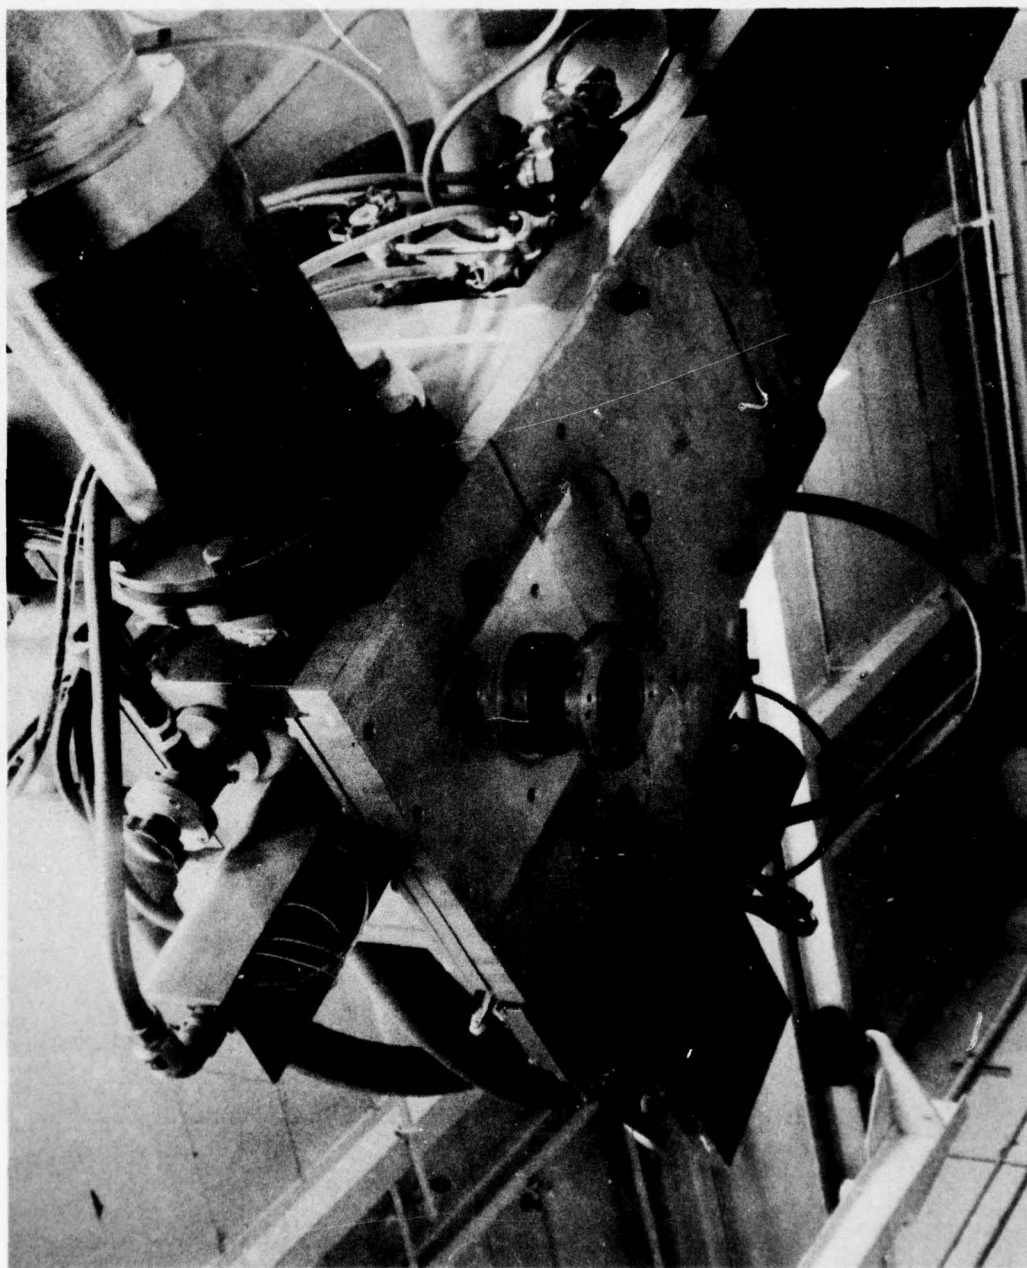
Sliding Seal Head Assembly Removed From Welder
